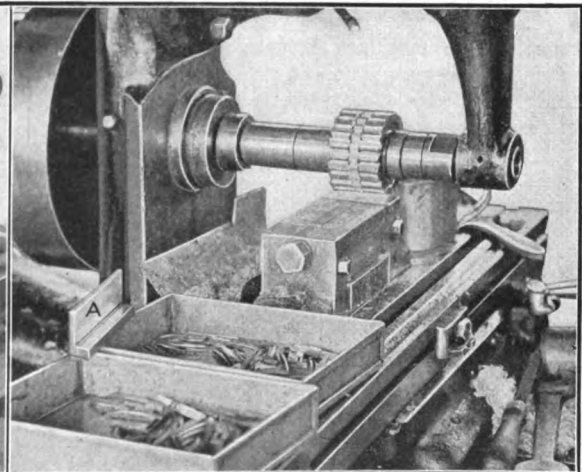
MILLING BACKS OF SADDLES. PRODUCTION: SIX IN JIG, 1,000 PER DAY
